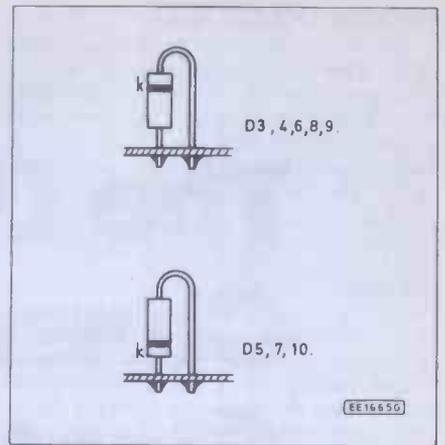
Polarity guide for mounting the diodes on the p.c.b.
